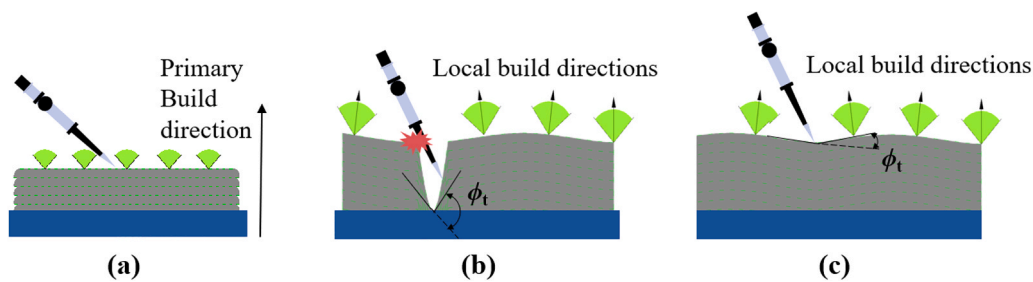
Collision problem for 3- and multi-axis printing: (a) flat printing surfaces have no collision risk (b) slight concave printing surfaces have low collision risk (c) deep concave surfaces have high collision risk, where ϕ_t denotes turning angle.
